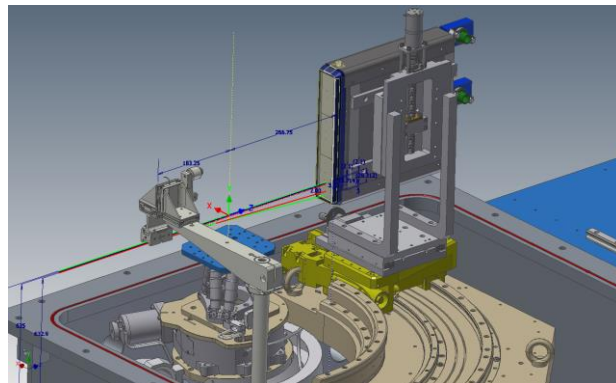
SMI: WAXS mechanics assembly showing completed models that have been handed off to designers to create prints for fabrication.
